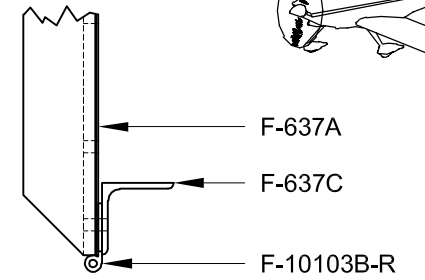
SEAT BACK ASSEMBLY ALIGNMENT
